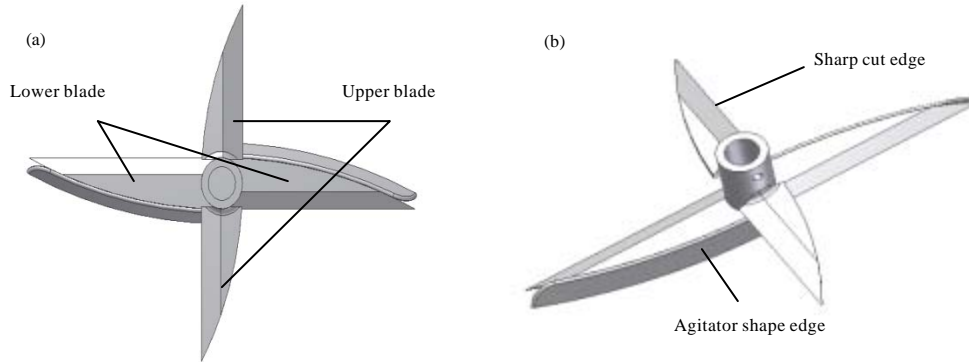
(a-b): Drawings of blade assembly (a) Top view and (b) Auxiliary view
